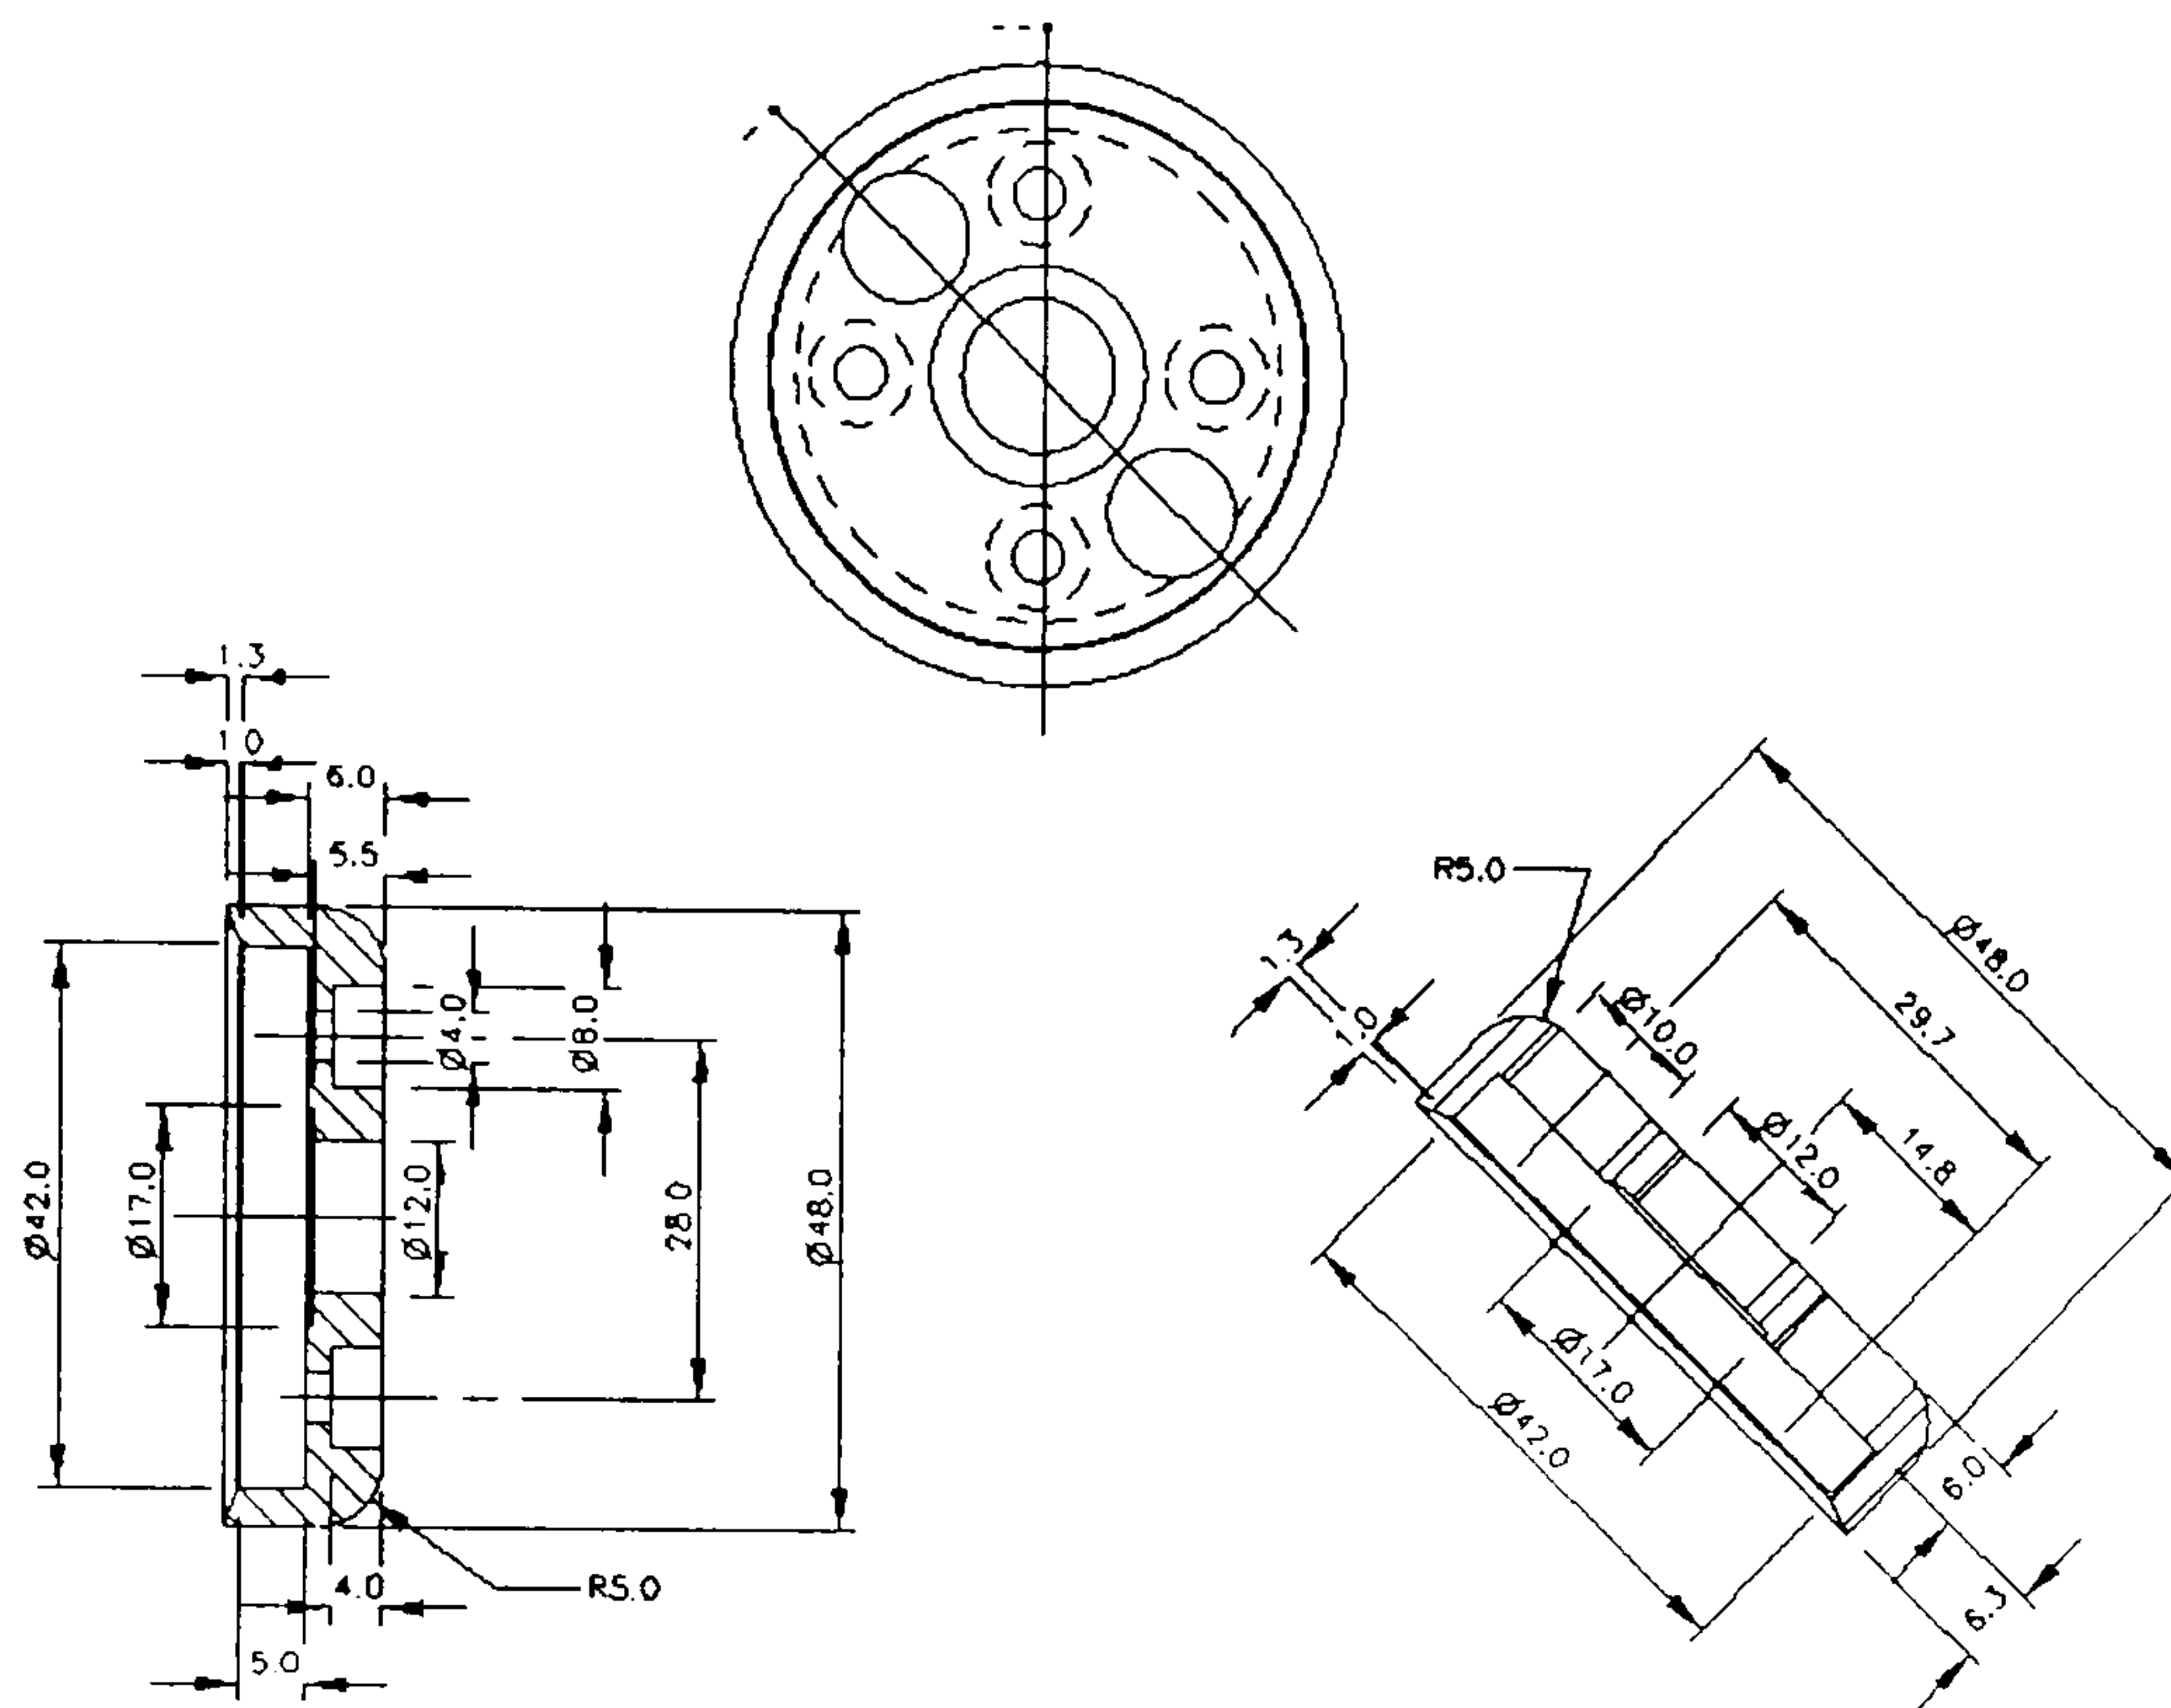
Representation of drawings produced for the manufacture of a prototype ultrasonic wheel probe.
